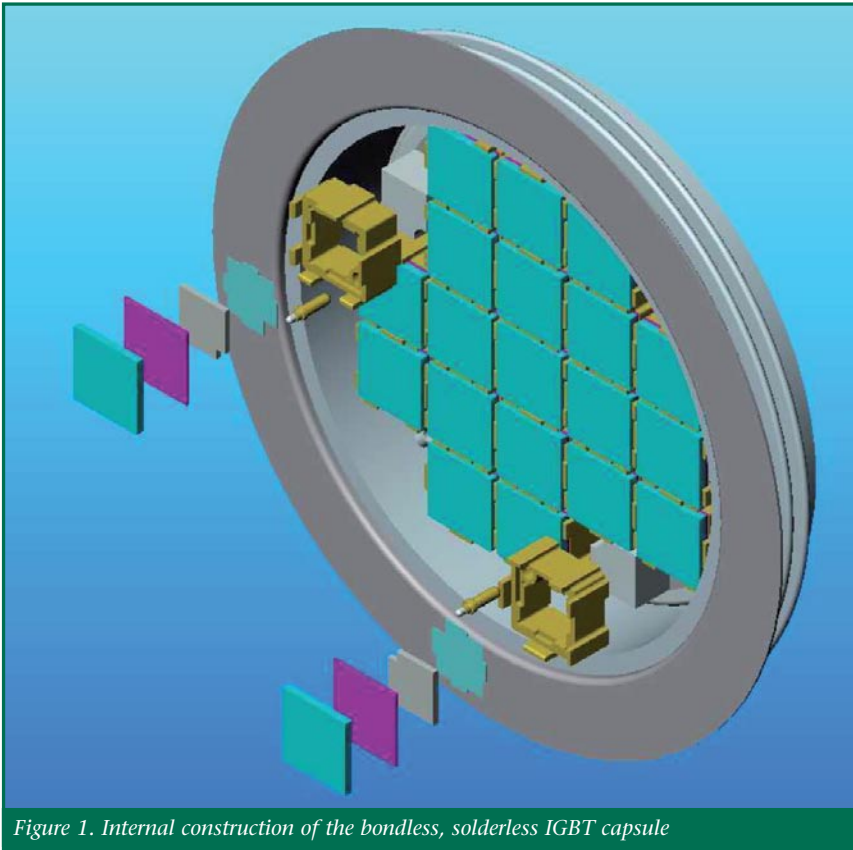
Internal construction of the bondless, solderless IGBT capsule
